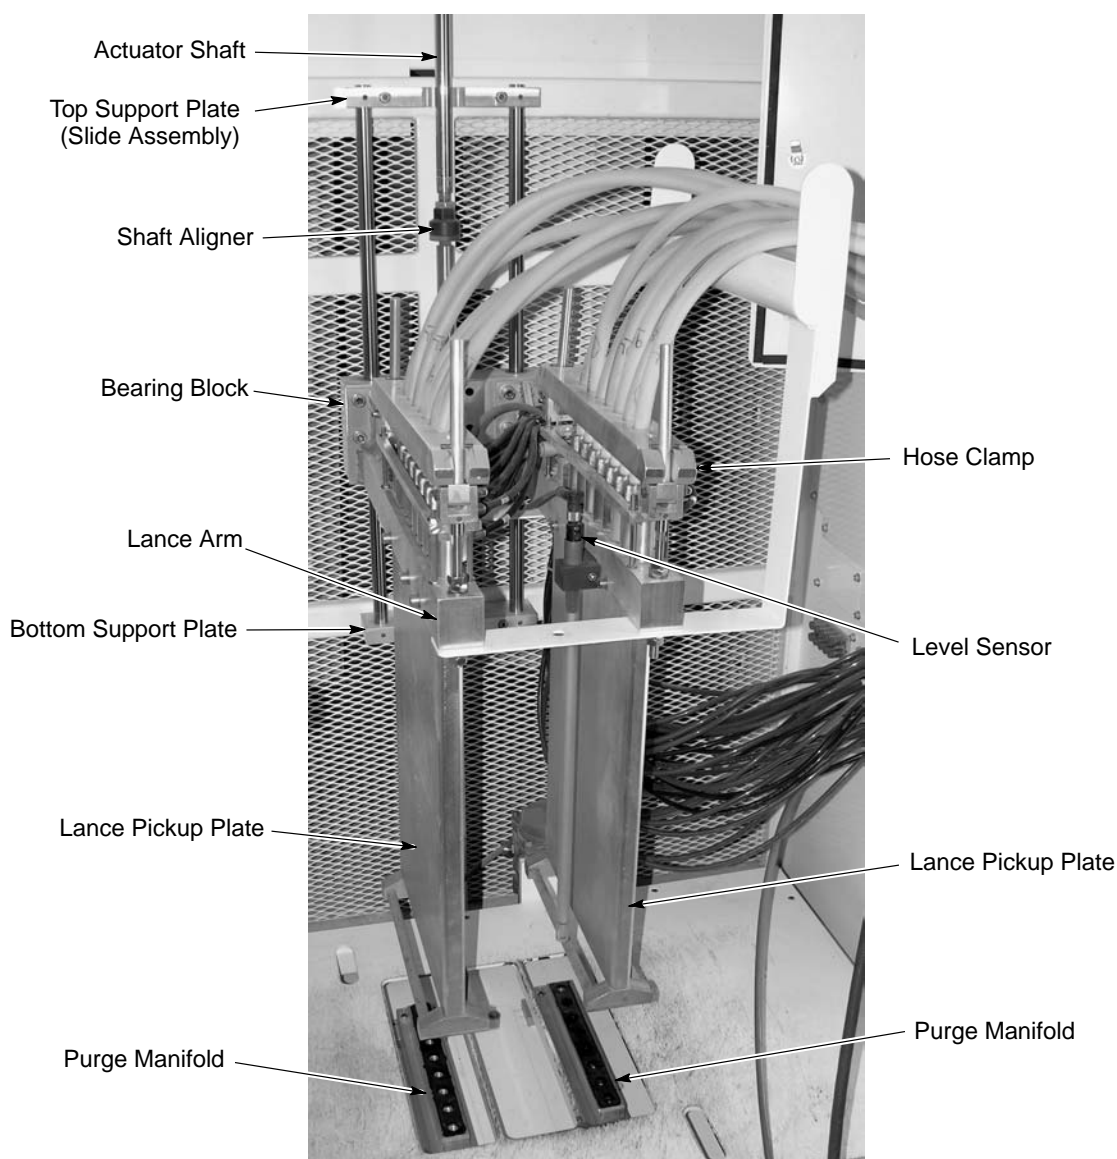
Typical Spectrum Feed Center Vertical Slide/Lance Assembly
